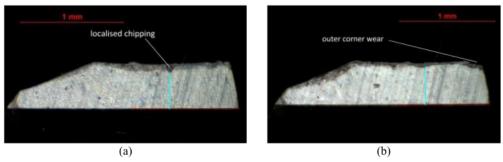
Wear of the tool under dry/no coolant drilling after second hole: (a) side 1 and (b) side 2
